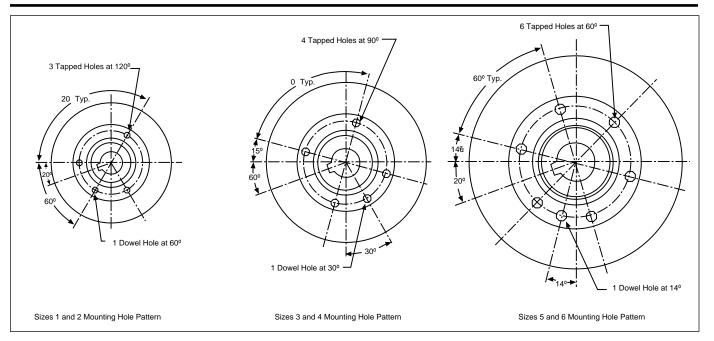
TYPE T STANDARD MOUNTING HOLE PATTERNS
